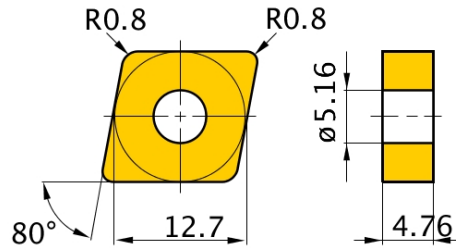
Design and appearance of PCBN cutting tip (CNMA120408).
